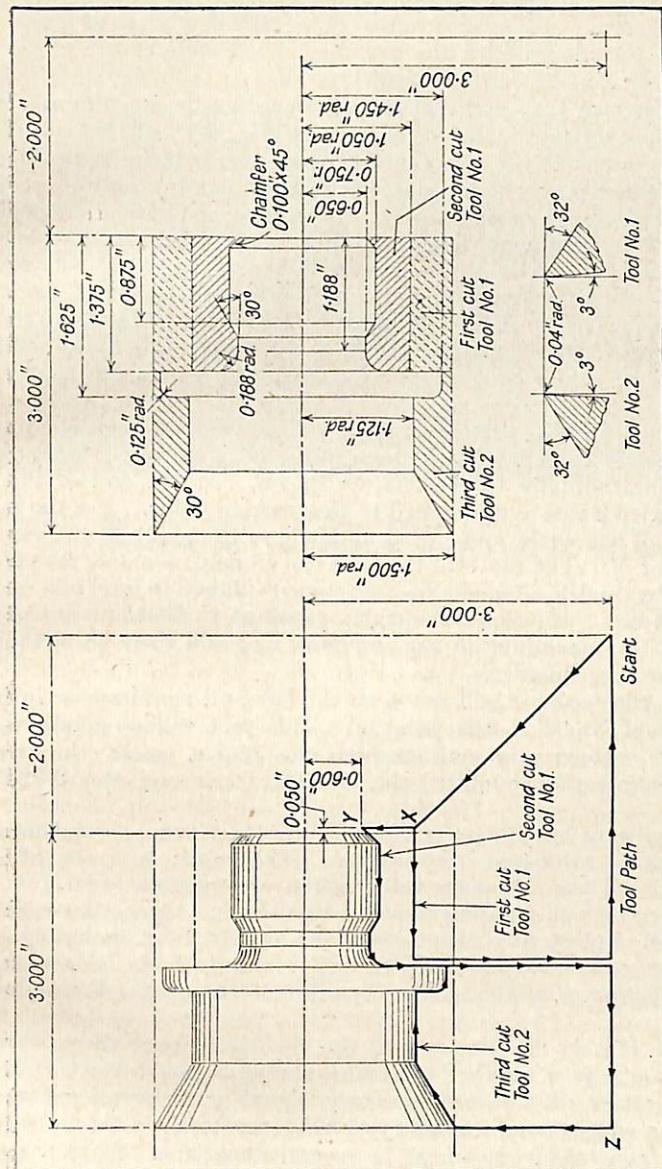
Hypothetical Workpiece showing the Stages of Machining under Automatic Control
